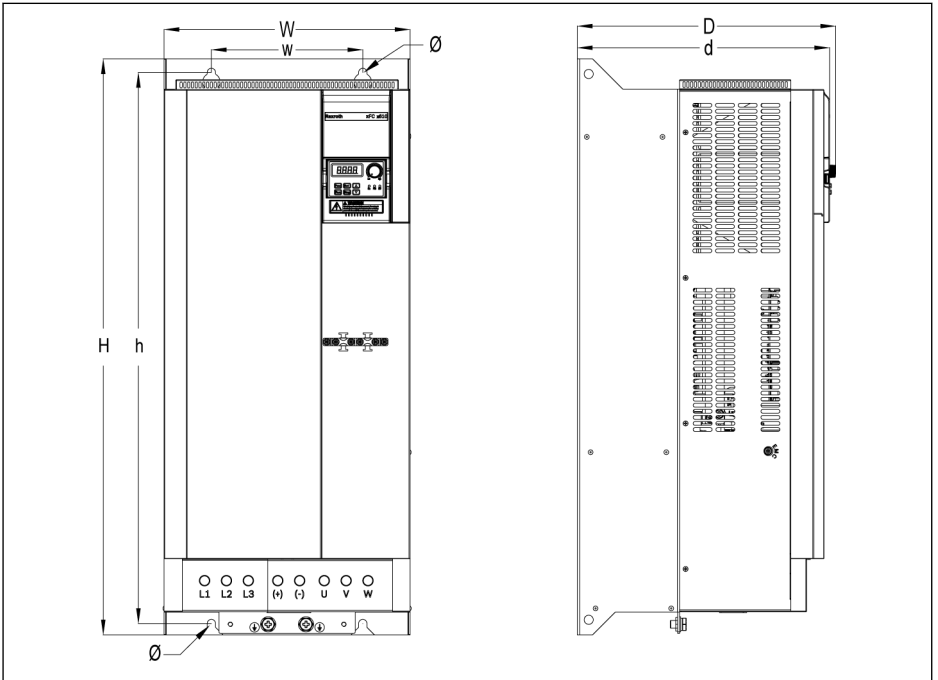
EFC 5610 75K0...90K0 dimensions figure
